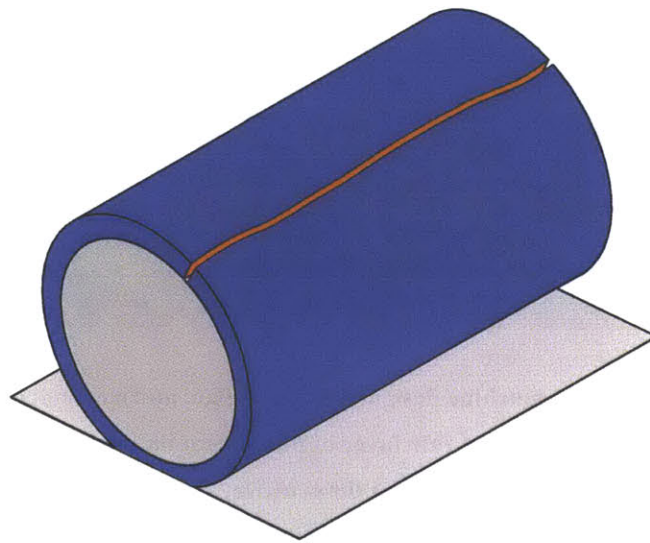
Roll-to-plate microcontact printing has traditionally been accomplished with planar stamps that are wrapped around a print roll. However, this technique will invariably present a gap or seam where the two ends of the wrapped stamp meet (orange). Such a seam results in a once-per-revolution impulse disturbance to the system, often orders of magnitude greater than the height of the stamp features.
